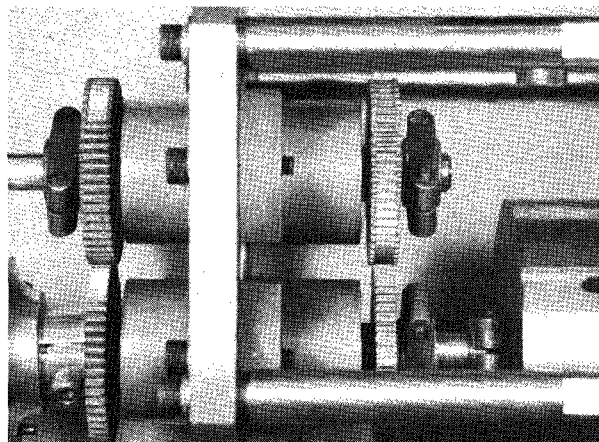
The in situ coated gears after the test. Note the wear path of the narrow gear in the larger gear.
